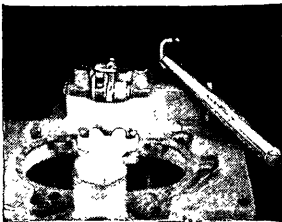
Install pump arm link in pump arm and collar and plunging shaft
